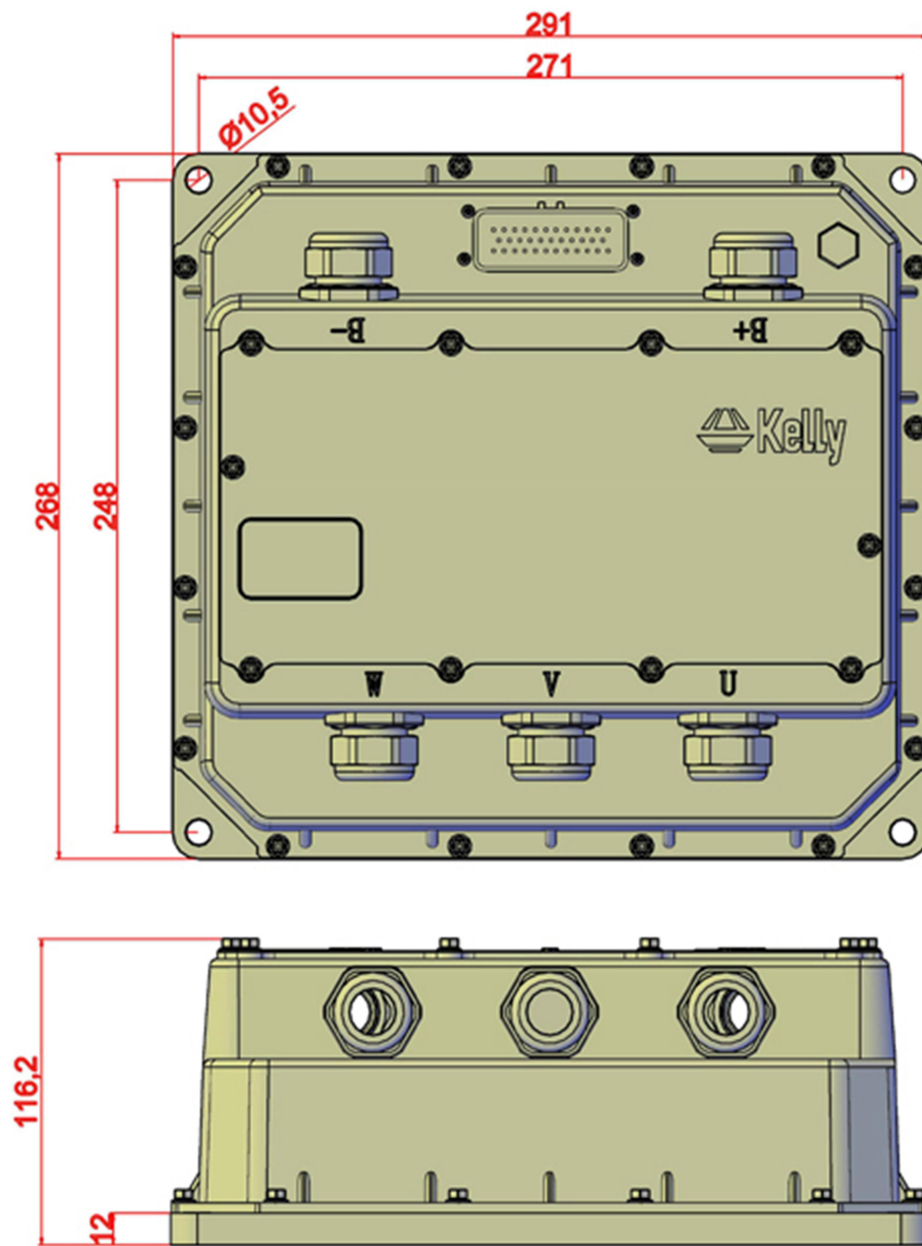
KLS-RMO model with Sealed Aluminium Housing
